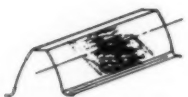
SHOWS THE CONTACT OF A 5° L.H. LAP WITH A SPUR GEAR TOOTH
